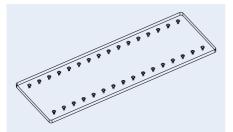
Microscopy slide through-hole platform – version with 32 fluidic interfaces
